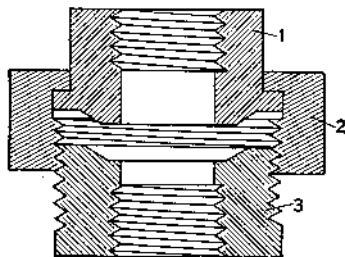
Pipe Fitting for Worksheet No. 23.
